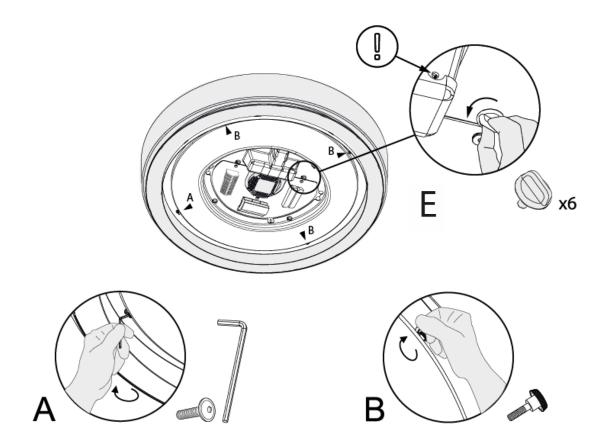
DISASSEMBLING THE CONDENSATE TRAY
